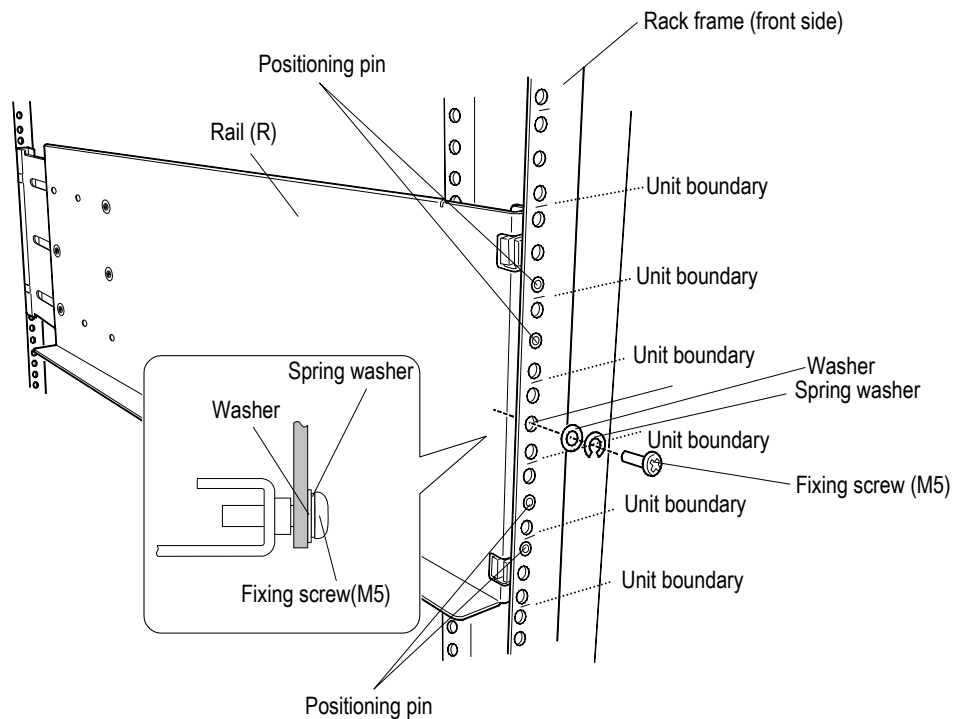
Installing Rack Rails for Drive Box (5U) in the Front Side
